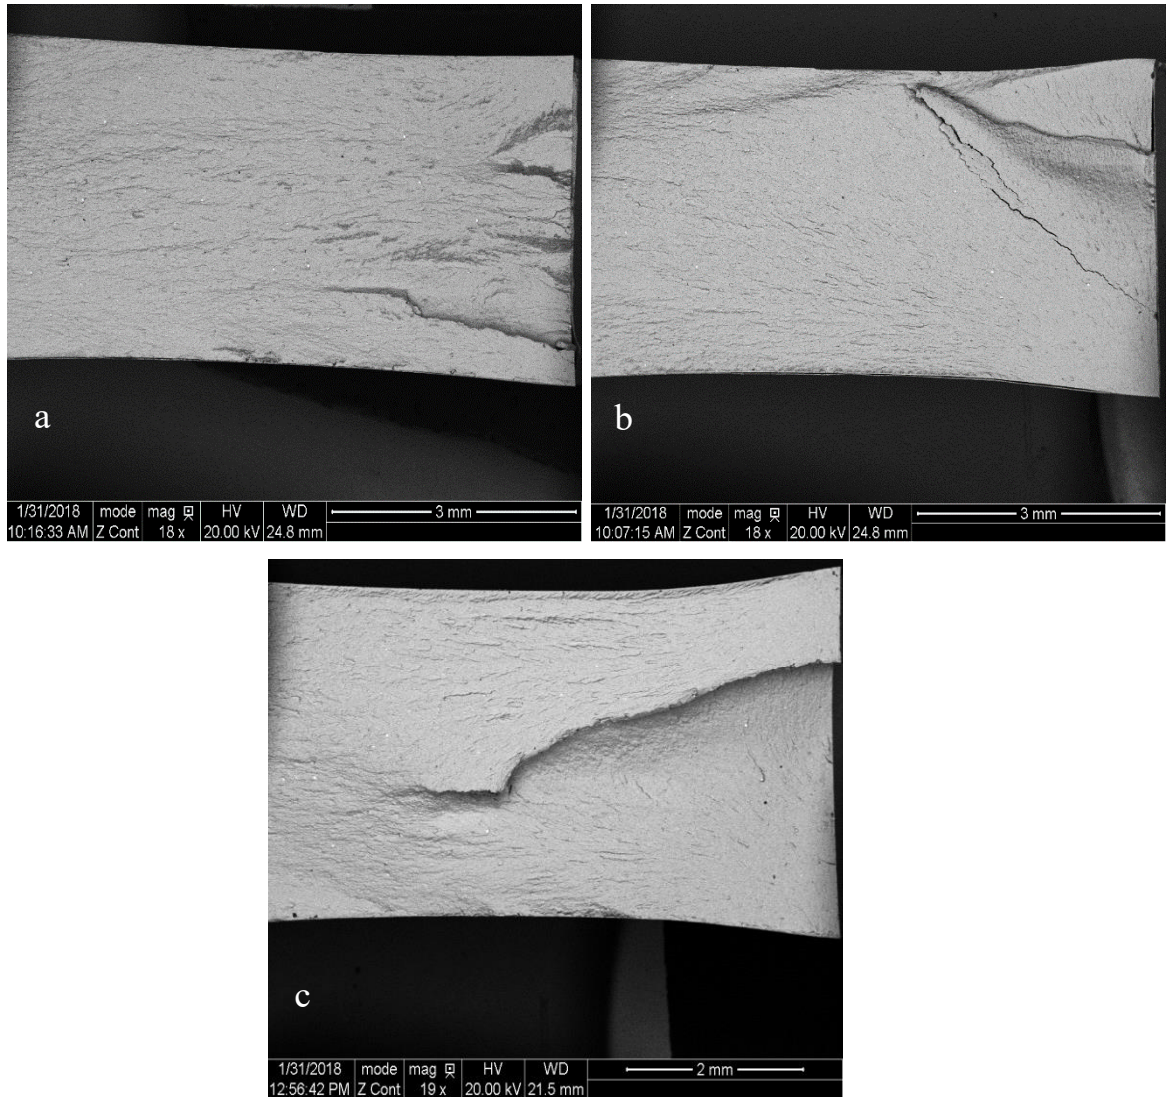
Fracture surface of 240 MPa fatigue tested sample, from top to bottom: UCE, SCE, DCE
